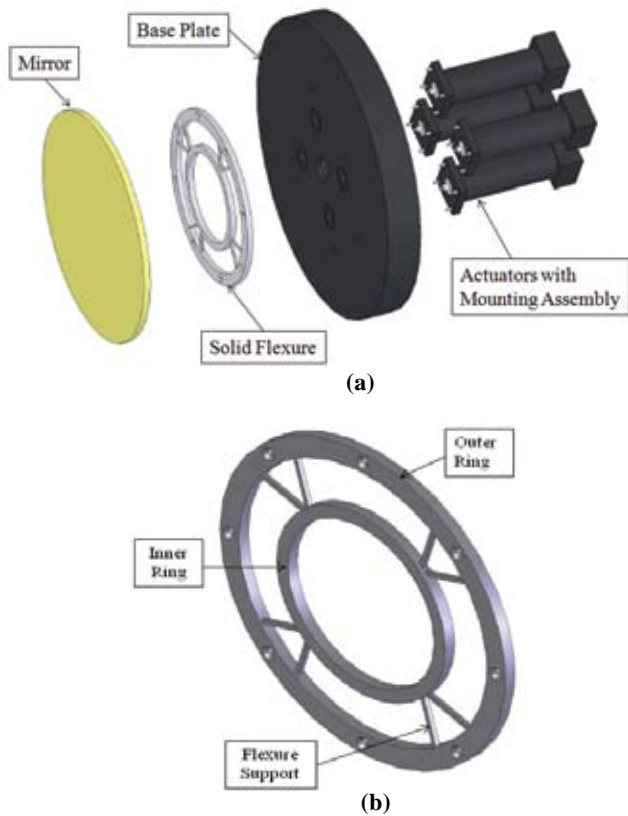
CAD model of TTM assembly (a) Exploded view (b) Flexure ring.
